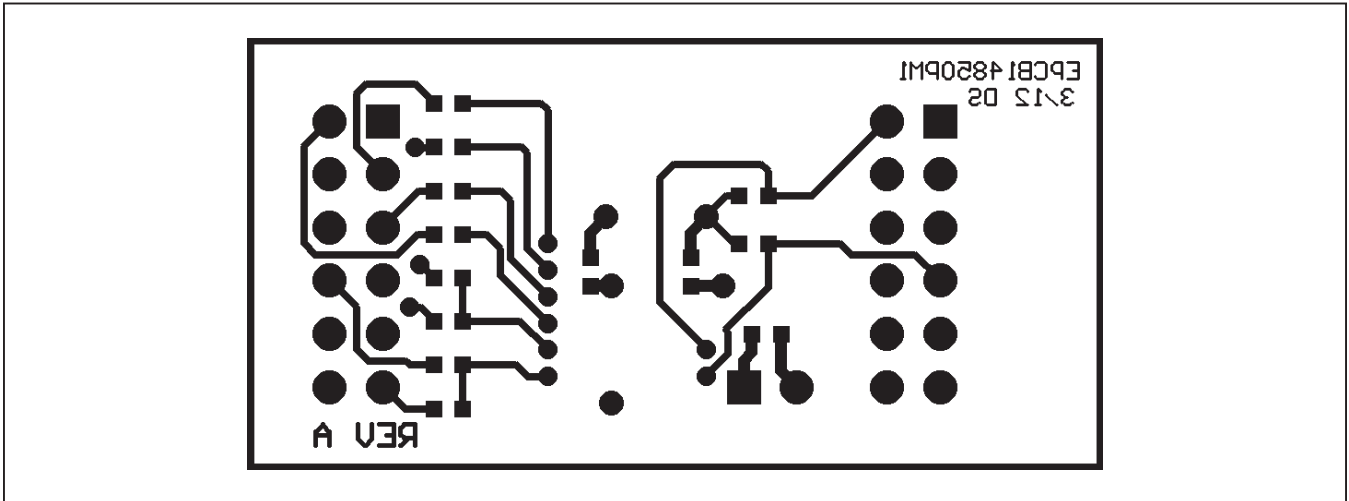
MAX14850PMB1 Peripheral Module PCB Layout—Solder Side
